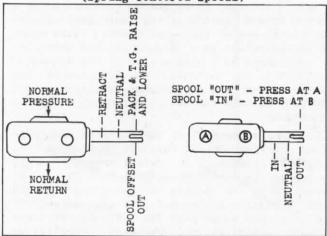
Secondary Valve Positions (Spool Offset "Out")
